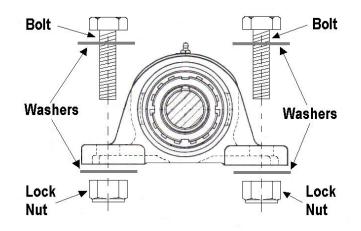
Bearing Housing with Nuts, Washers, and Bolts
